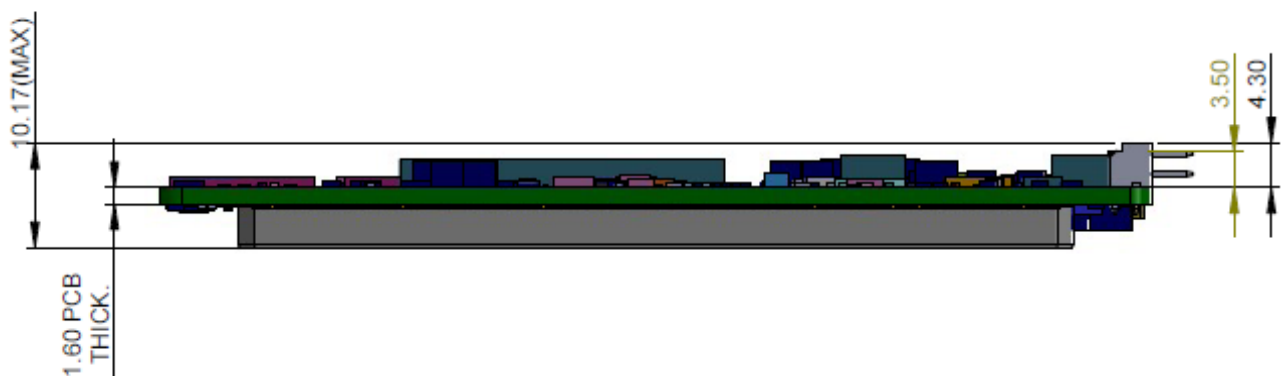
Mechanical dimension of Zynq Ultrascale+ MPSoC SOM - Side View
